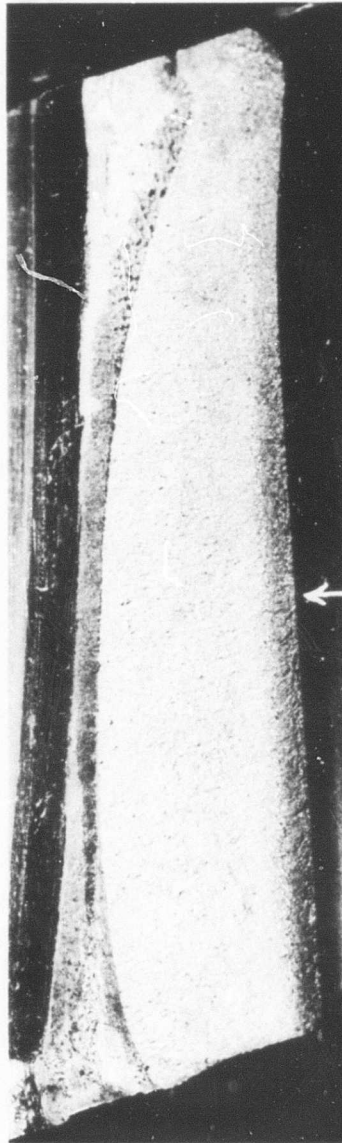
Detail Views of Failure Surfaces, Showing Flat Failure Surface Typical of Fatigue (Magnification: 6 \times).
